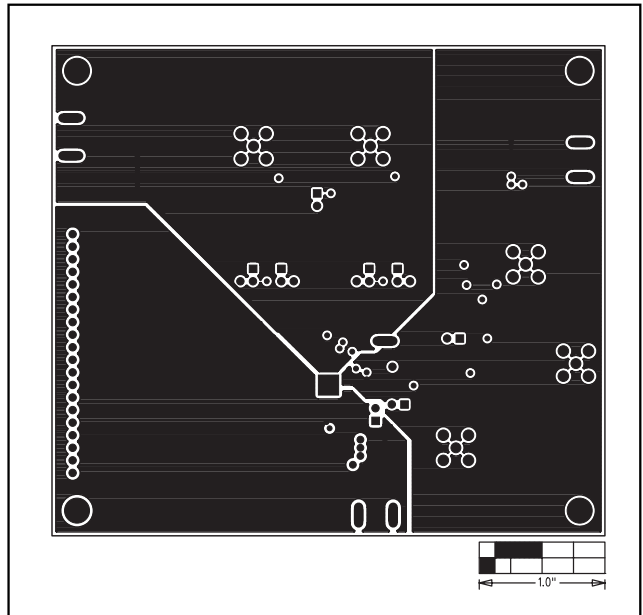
MAX5852 EV Kit PC Board Layout—Power Plane (Layer 3)
